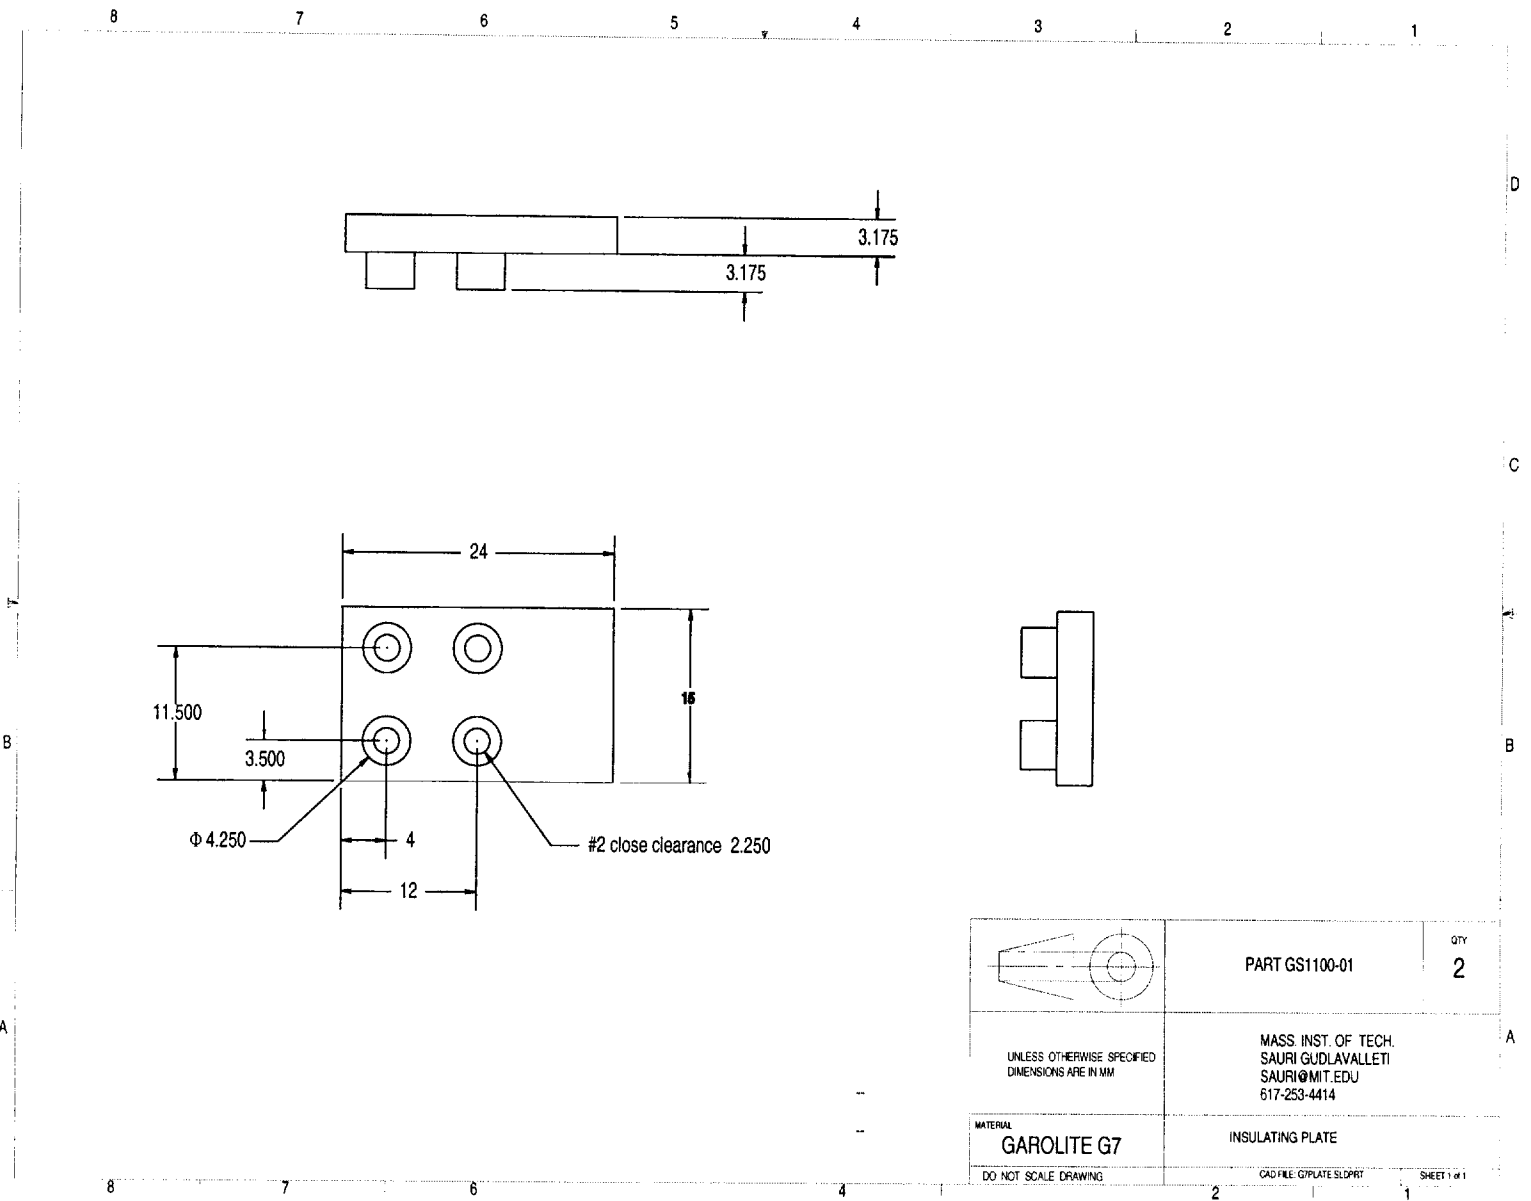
Part GS 1100-01. Insulation plate for use with Part GS1100-03, 04 or other appropriately designed grips. Ref. Fig. 4-4 for an assembly drawing.
